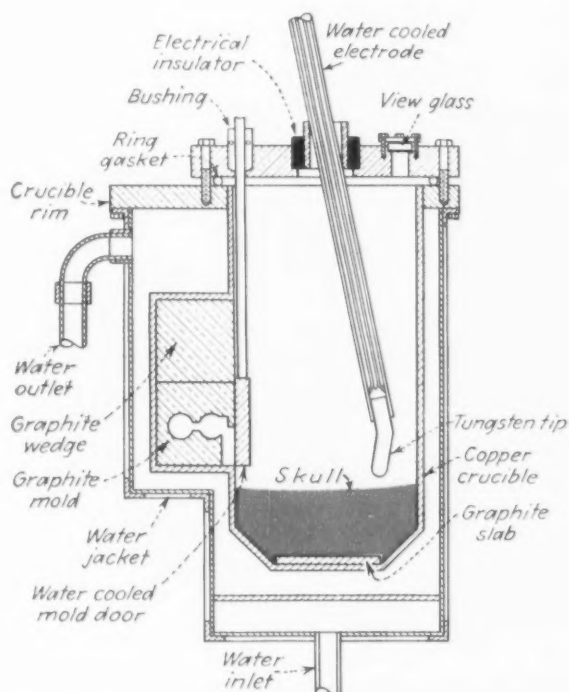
Cross section drawing of the skull melting furnace developed at Frankford Arsenal. The mold which is also encased in the vacuum furnace is machined from solid graphite.
